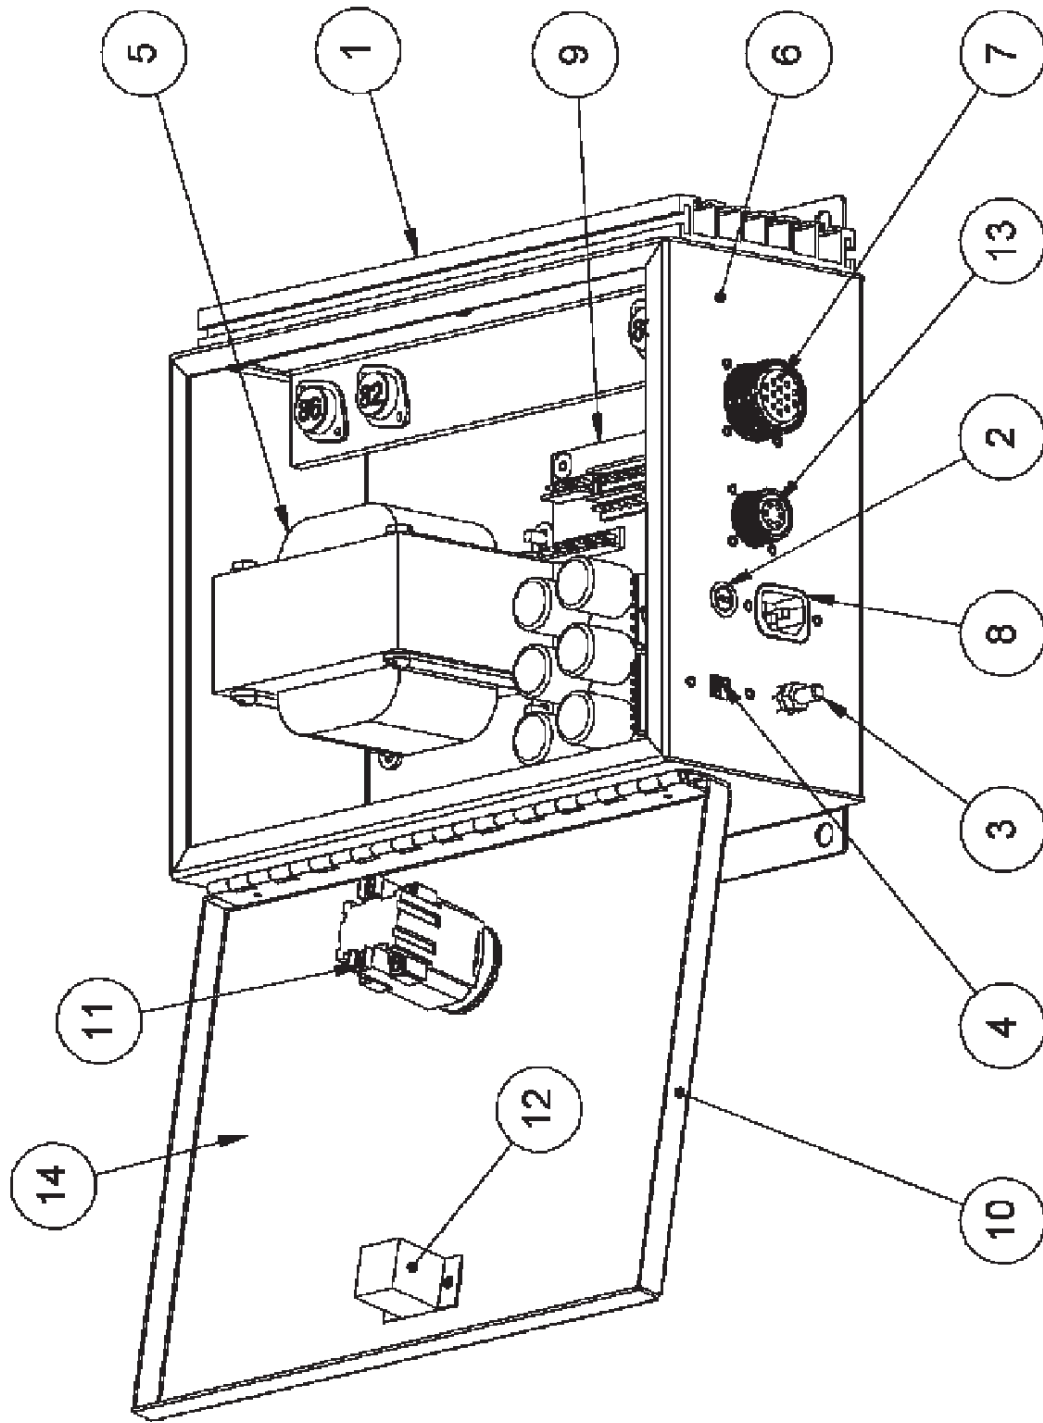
MOTORIZED SLIDE CONTROL EXPLODED VIEW
